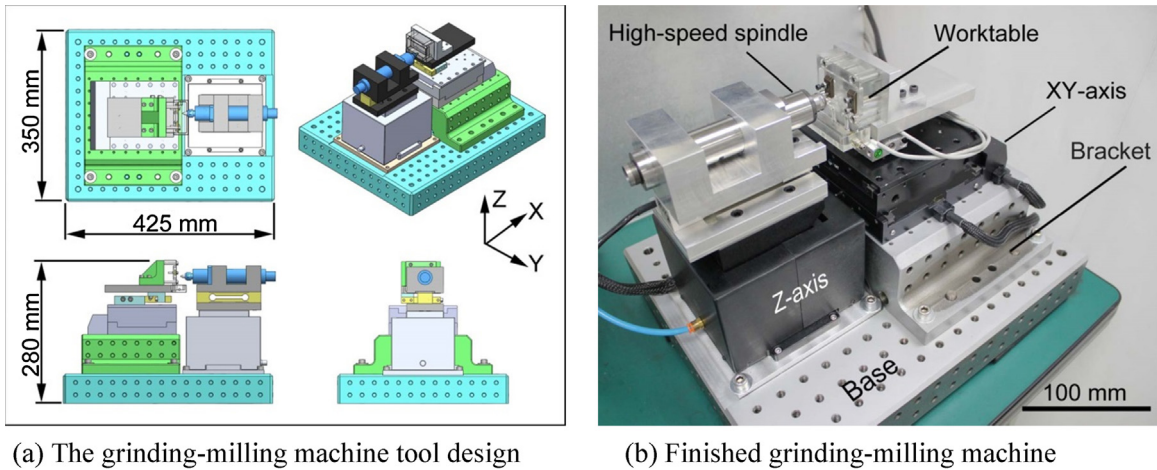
Construction of the intellectualized compact grinding-milling machine.
